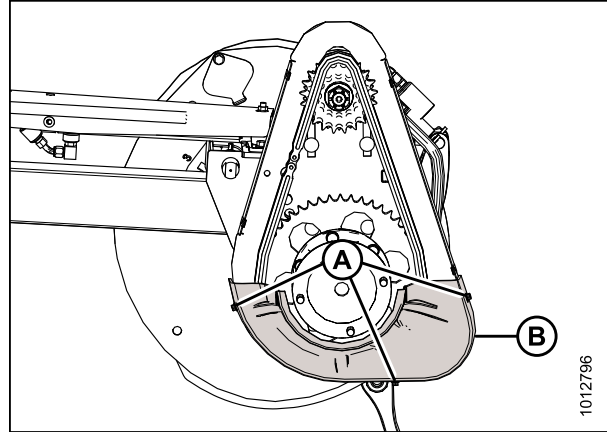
Lower Drive Cover (Upper Cover Removed)
